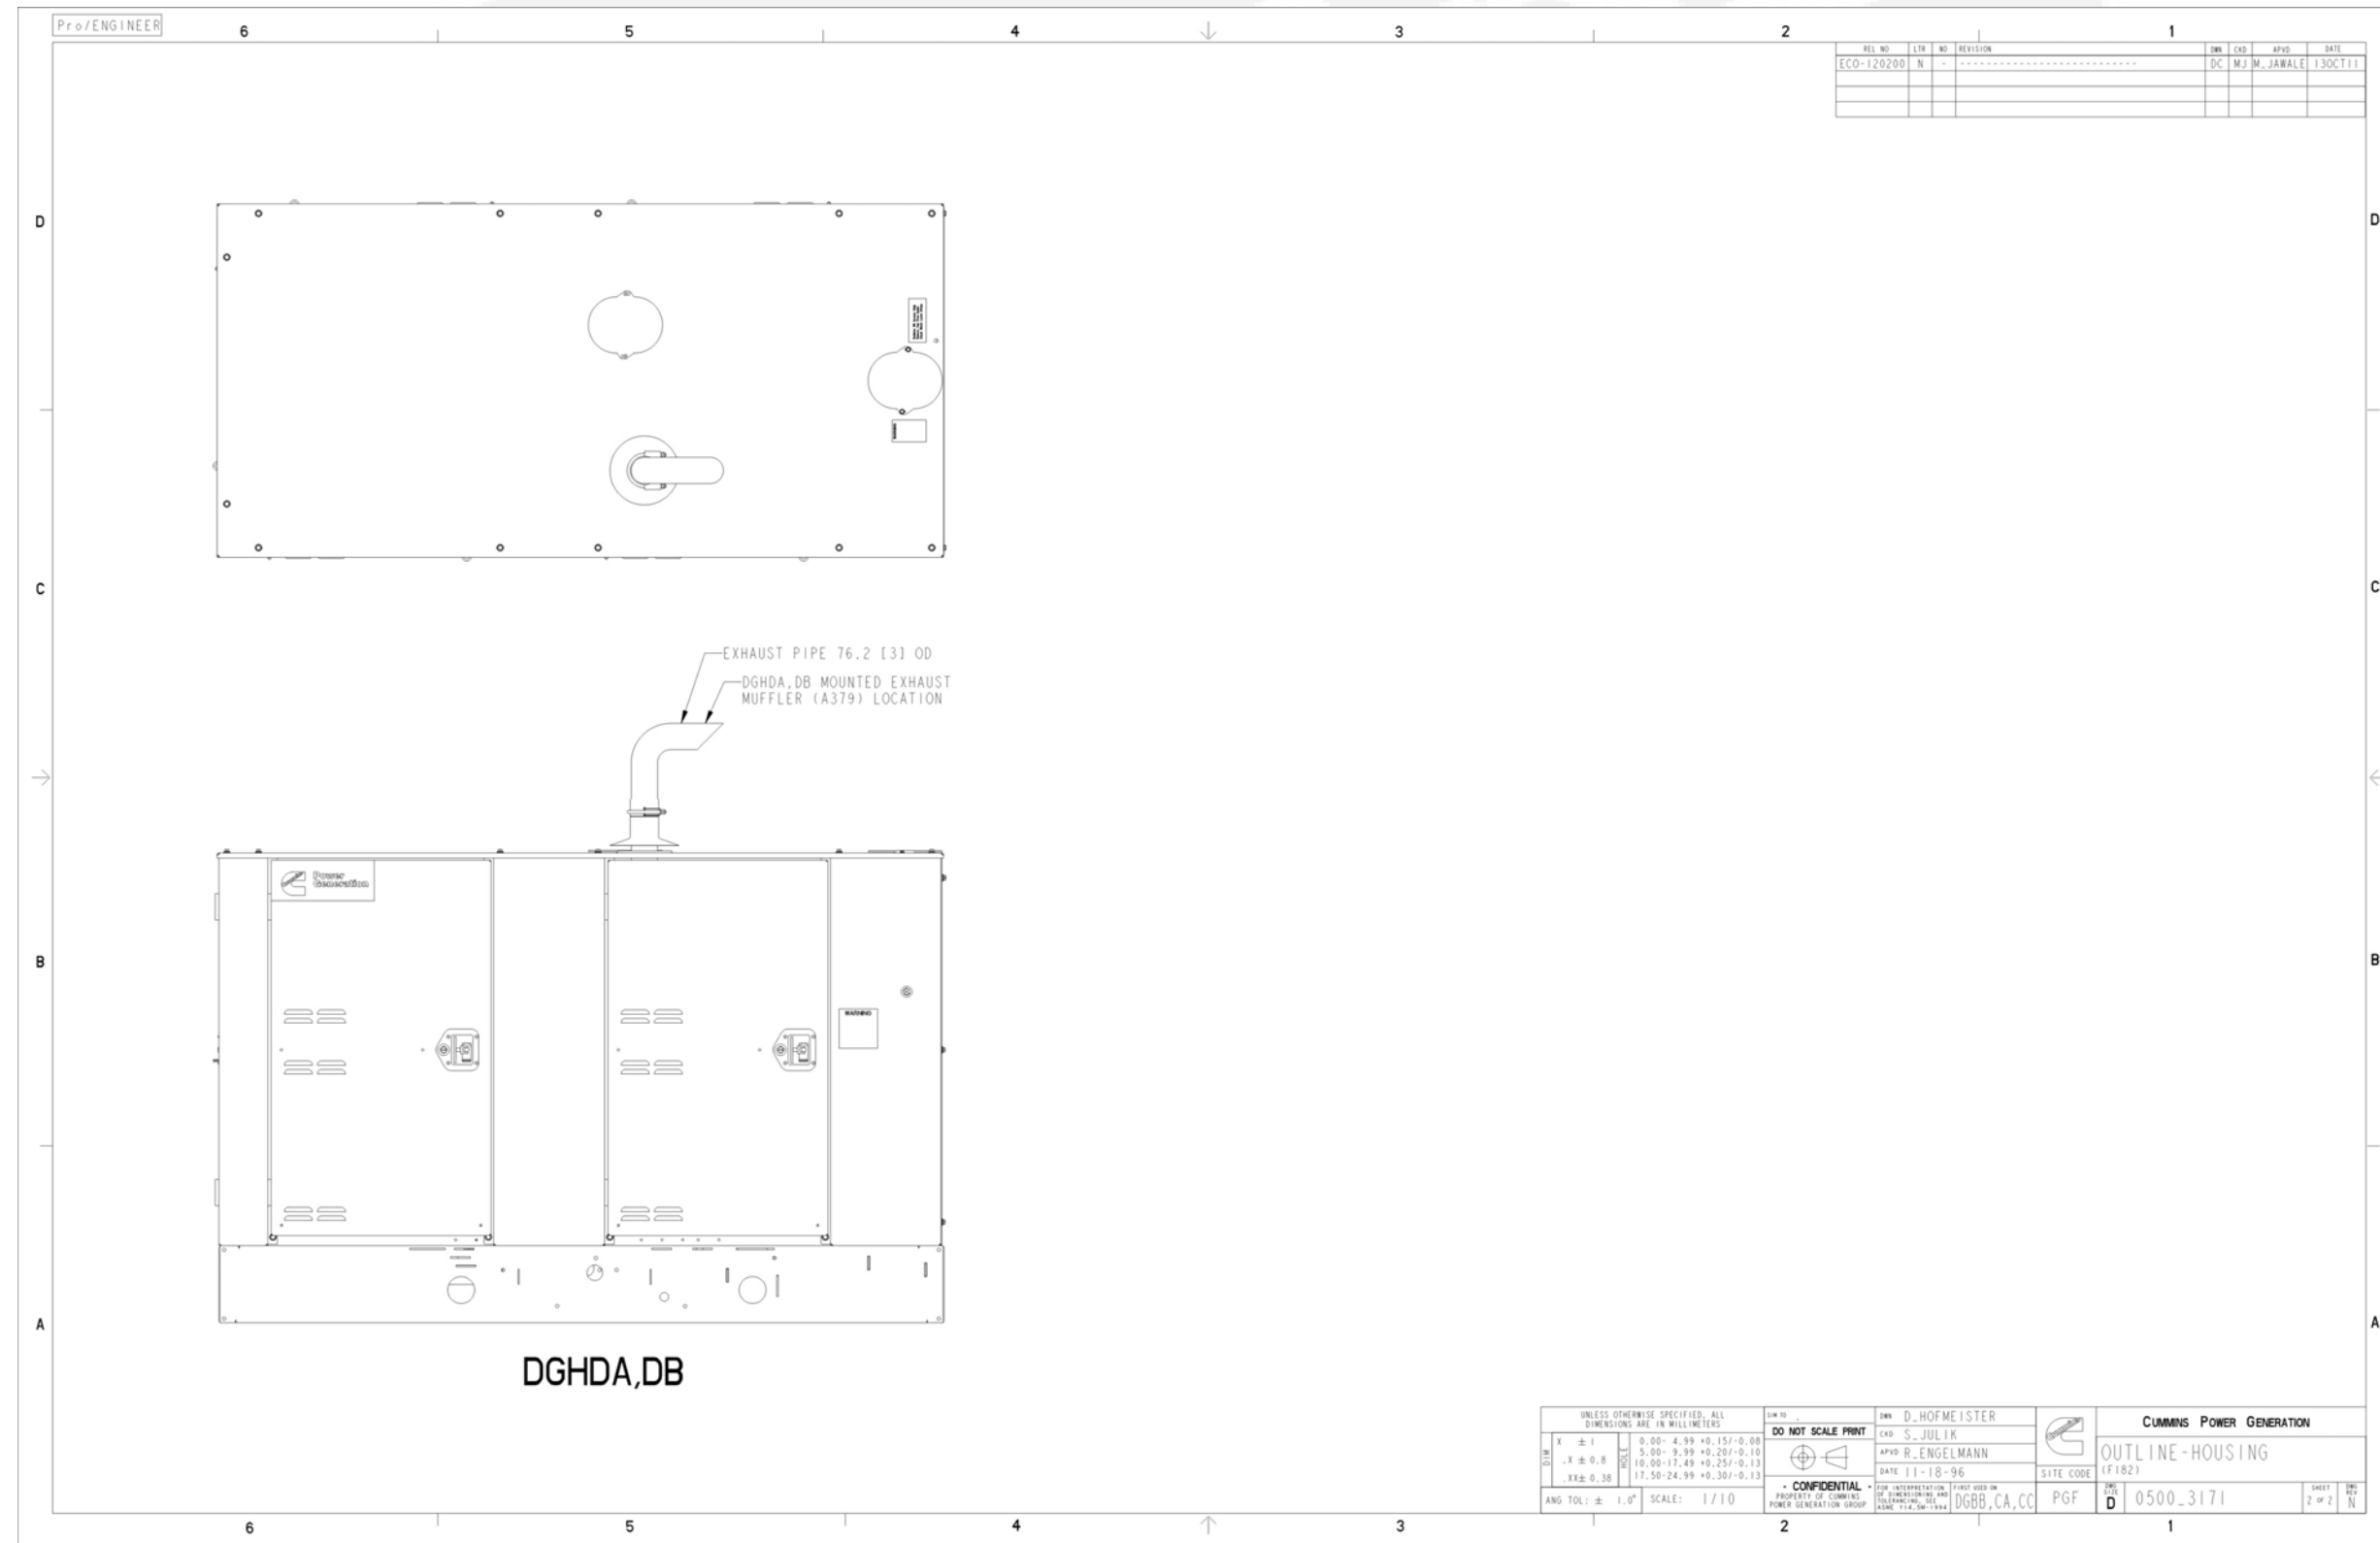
OUTLINE DRAWING (500-3171) SHEET 2
